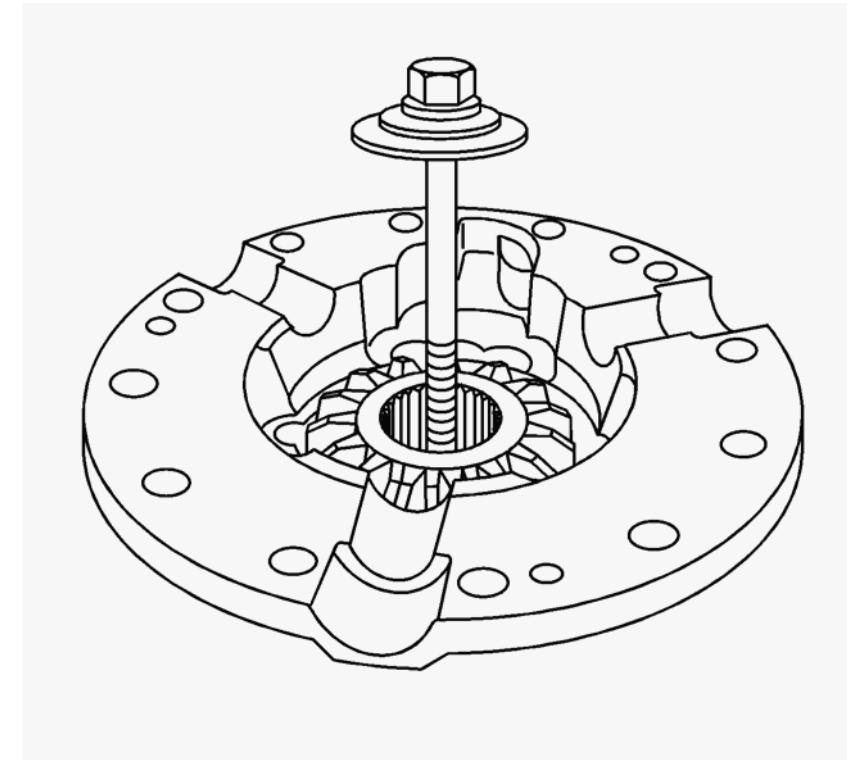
Bolt And Washer Assembly Through Differential Case Half
